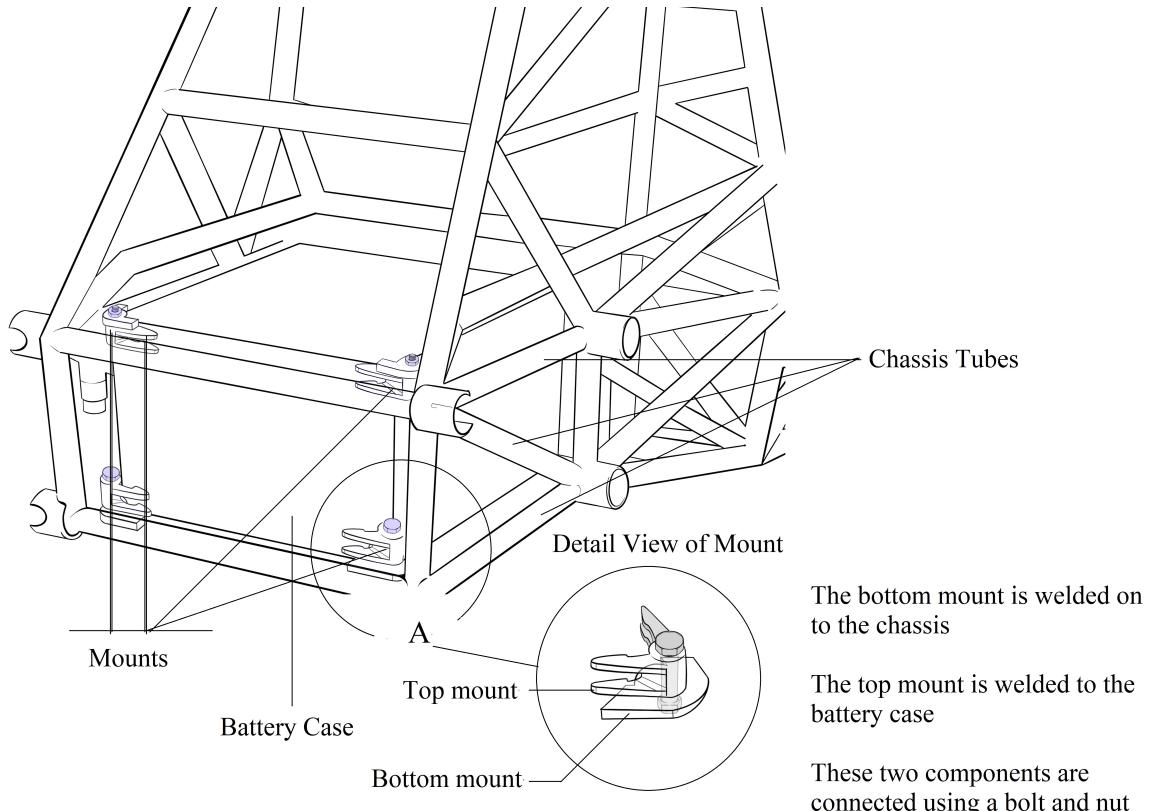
Isometric view of a battery indirectly mounted onto the chassis [16]
